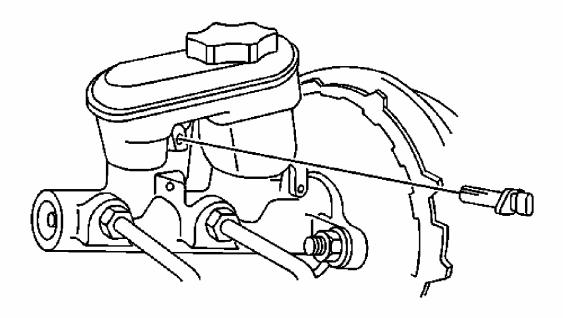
Installing Brake Fluid Level Sensor Courtesy of GENERAL MOTORS CORP.
